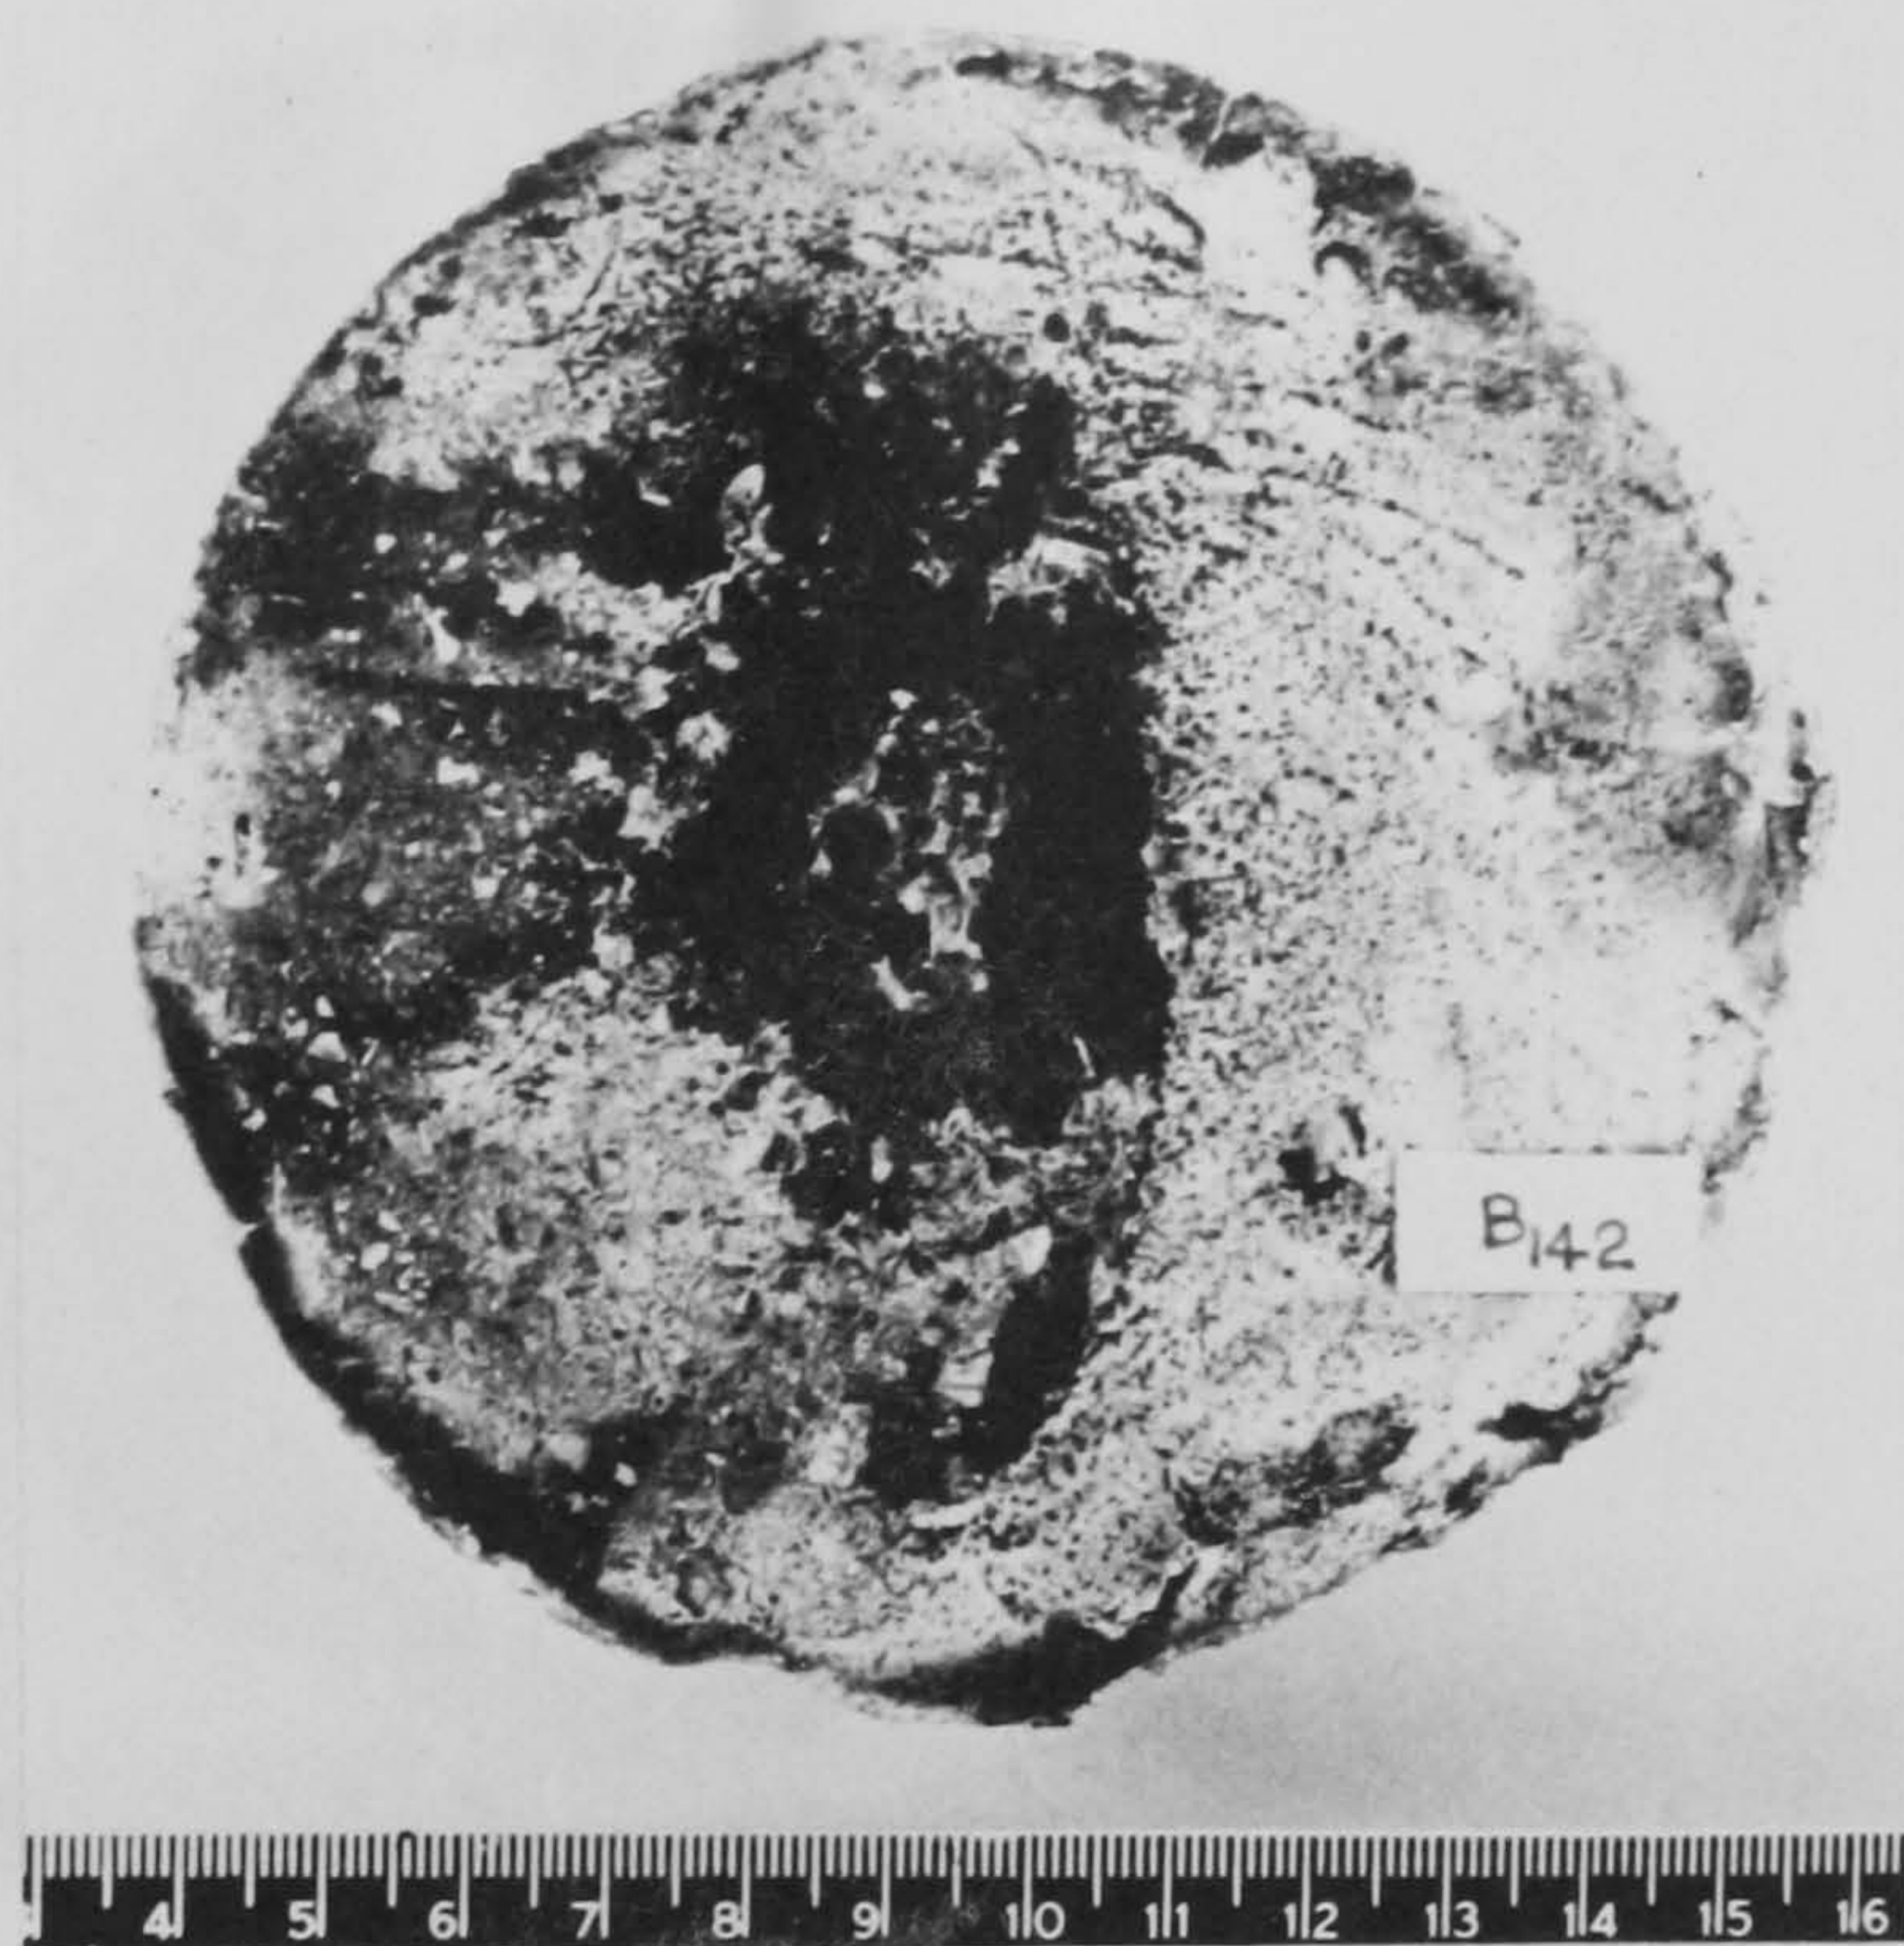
34 70 mm SPECIMEN AFTER TEST
